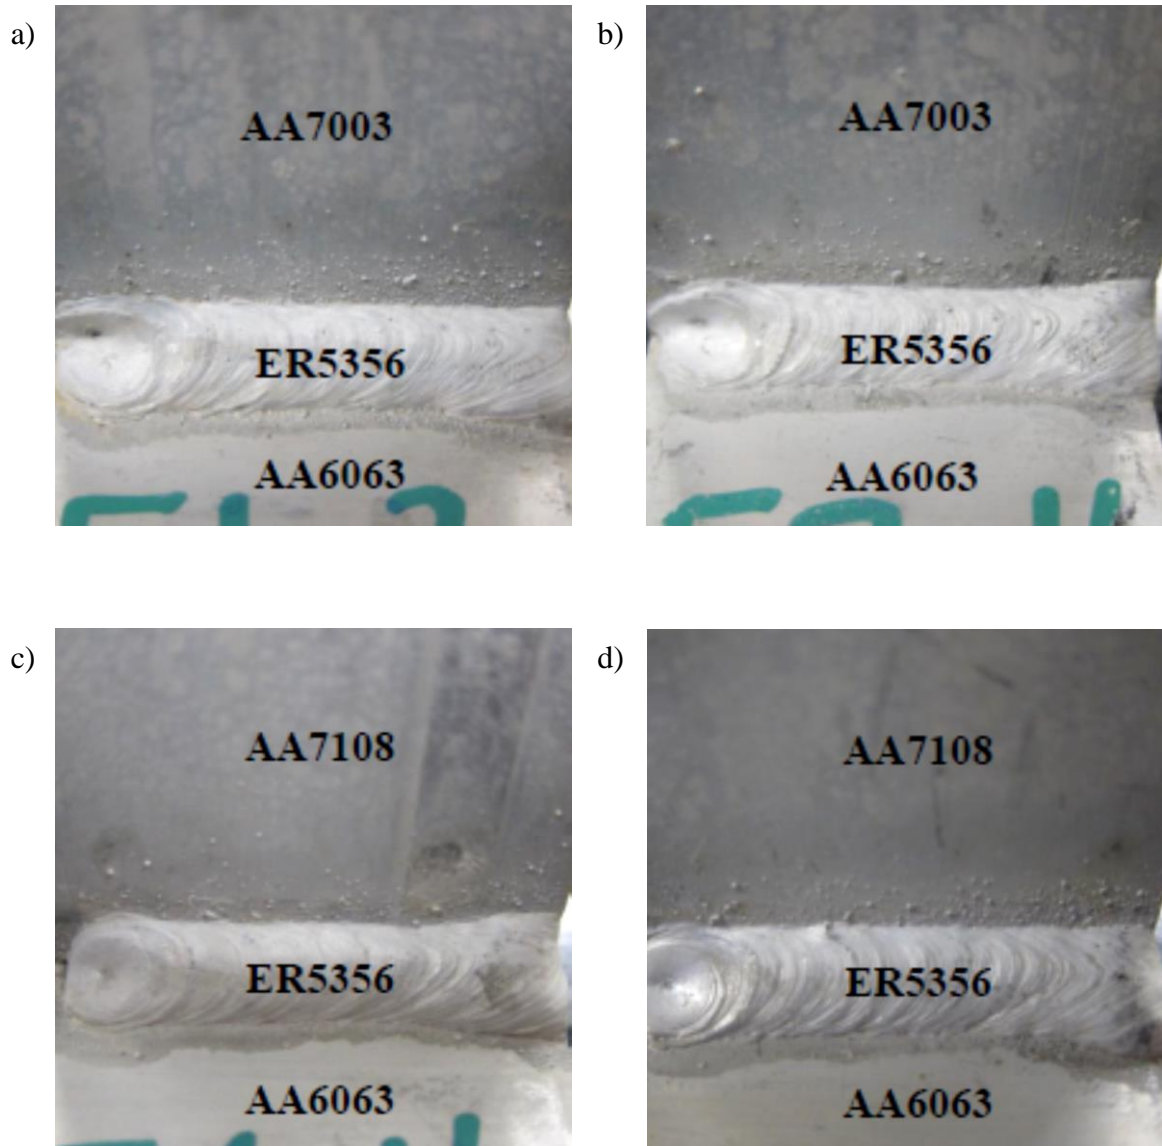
Photographs of lap-joint welded AA7003 (configurations E1 and E3) in (a) as-welded T6 condition, (b) as-welded T6+PB condition and lap-joint welded AA7108 (configurations F1 and F3) in (c) as-welded T6 condition, (d) as-welded T6+PB condition exposed to GMW-14872.
